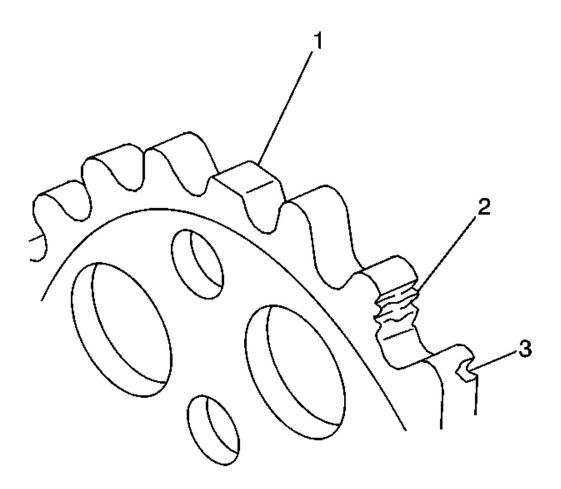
Identifying Damaged Sprocket Teeth Courtesy of GENERAL MOTORS CORP.
